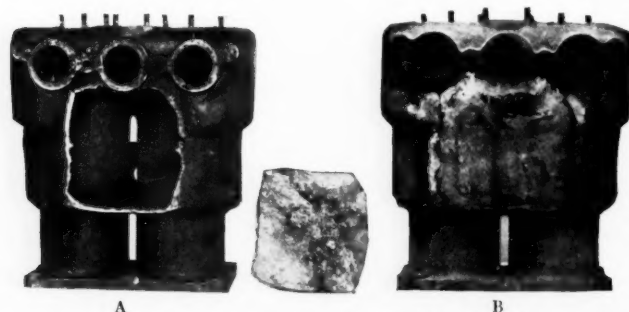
A—Before the weld—Showing the extent to which a cylinder block may have to be "patched" in event of breakage due to frozen cooling mixture. B—After the weld—The "patch" in place,—the block ready for service once again.
